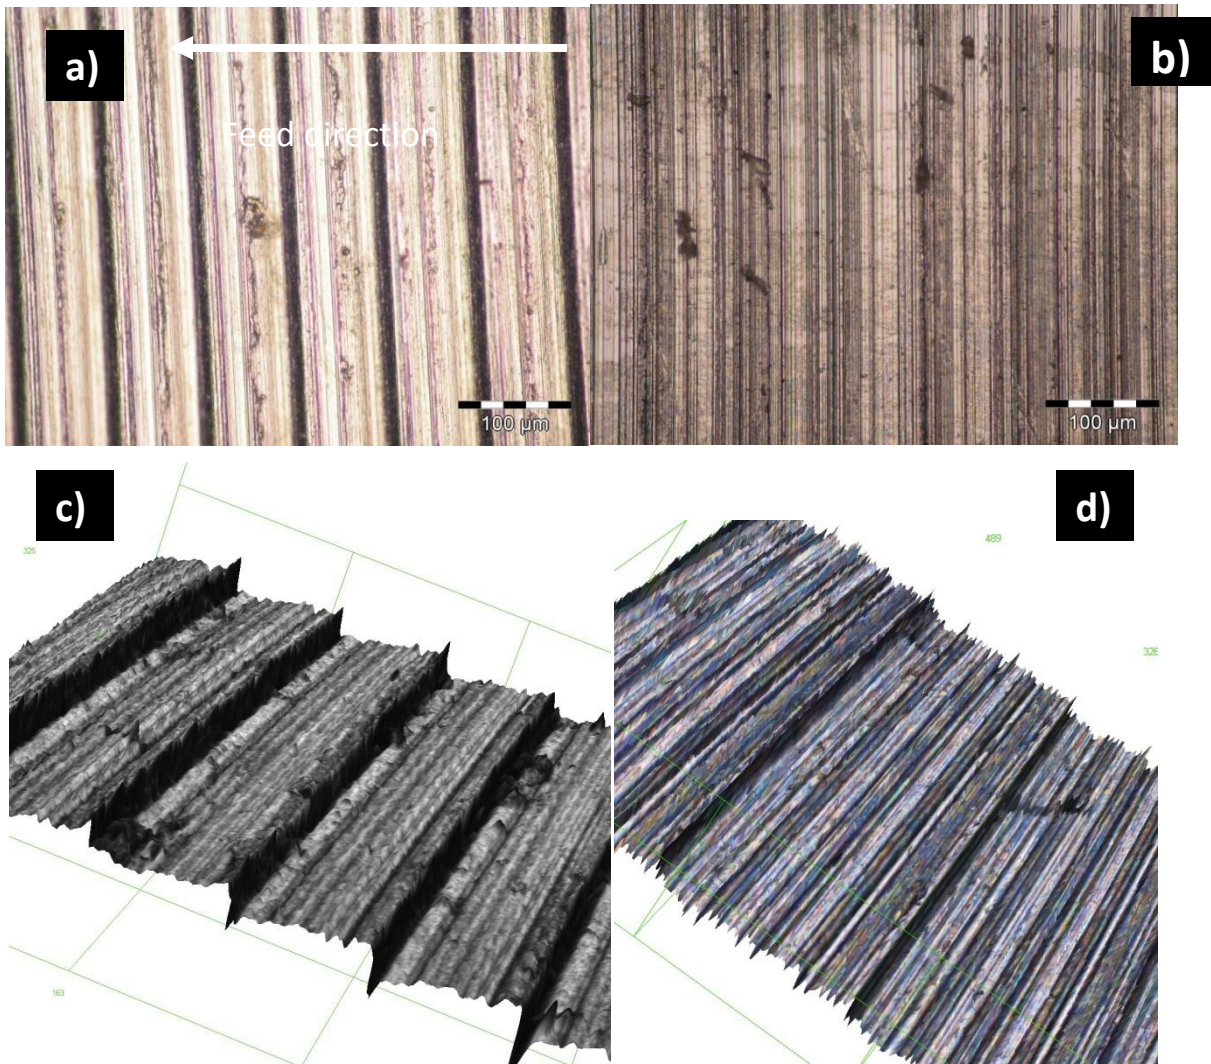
Machined surfaces a) CBN-100, 2D optical micrograph, b) CC650, 2D optical micrograph, c) CBN-100, 3D Optical micrograph, d) CC650, 3D optical micrograph, at cutting speed of 100 m/min, feed 0.1 mm/rev, DOC 0.1 mm
